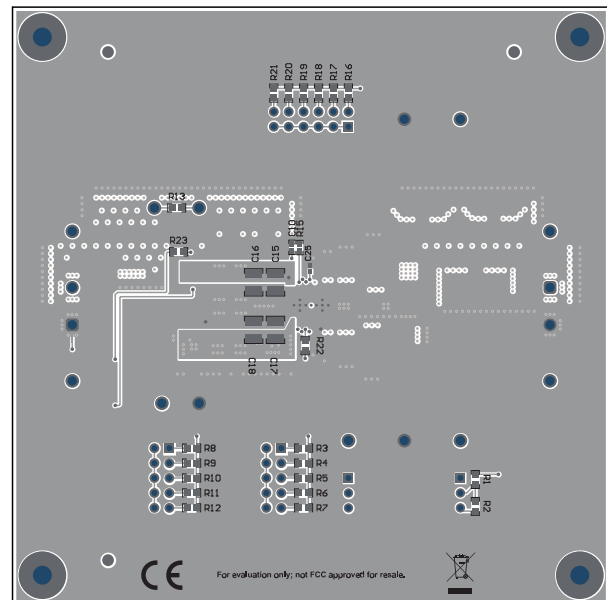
Bottom-Side Composite View (Viewed From Bottom)
